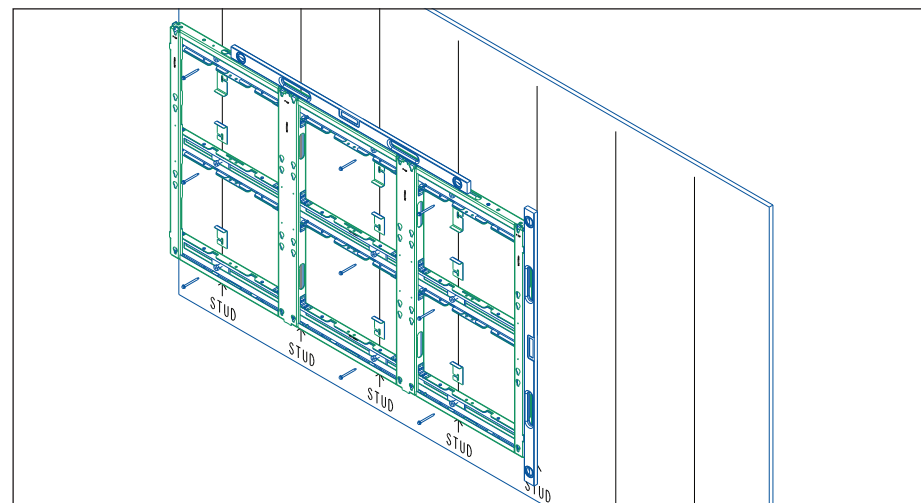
Install TEK Screws in Remaining Bolt Assemblies
